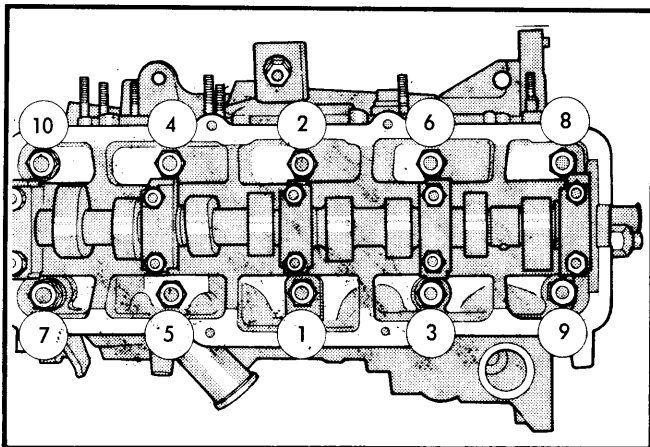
Cylinder Head Tightening Sequence (Loosen in Reverse Order — No. 10 To No. 1)
